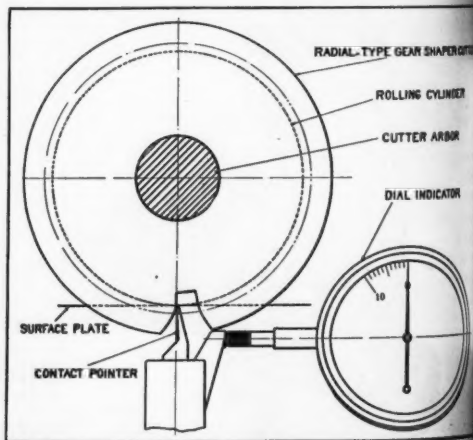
Drawing illustrating principle upon which involute testing machine operates.
